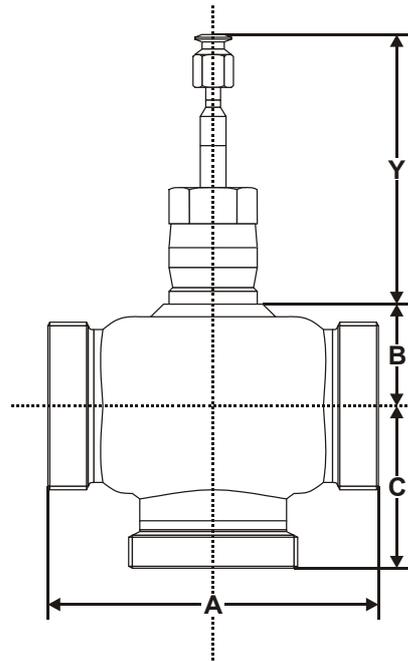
CLVT2W, CLVT3W, dimensions (in mm)
